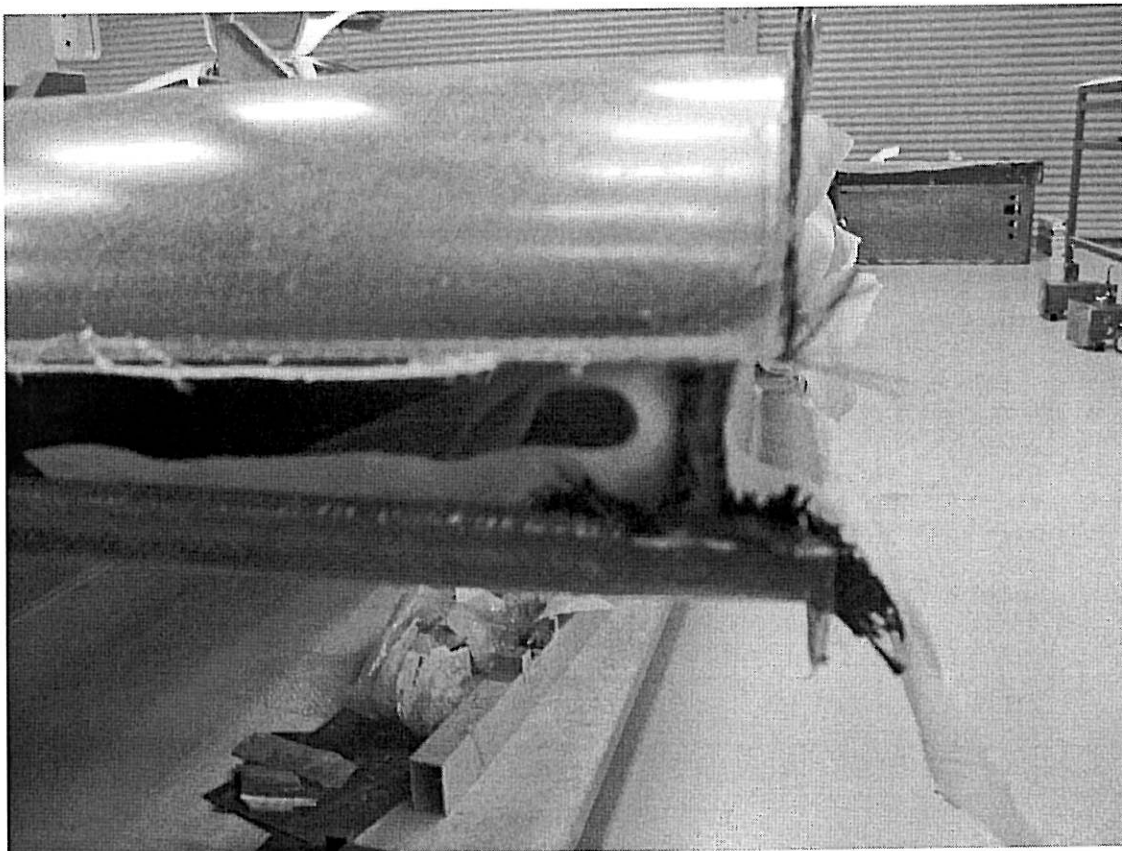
Peel plies still attaching the surface, waiting to be removed.
